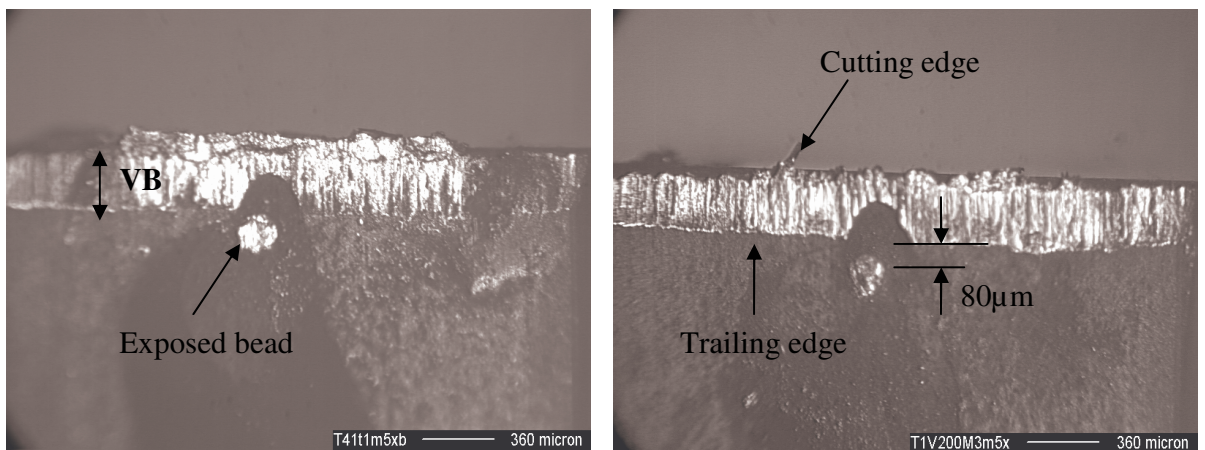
Location of bead: (a) after cleaning cut, (b) after machining with 310 μm flank wear at 100 m/min.
